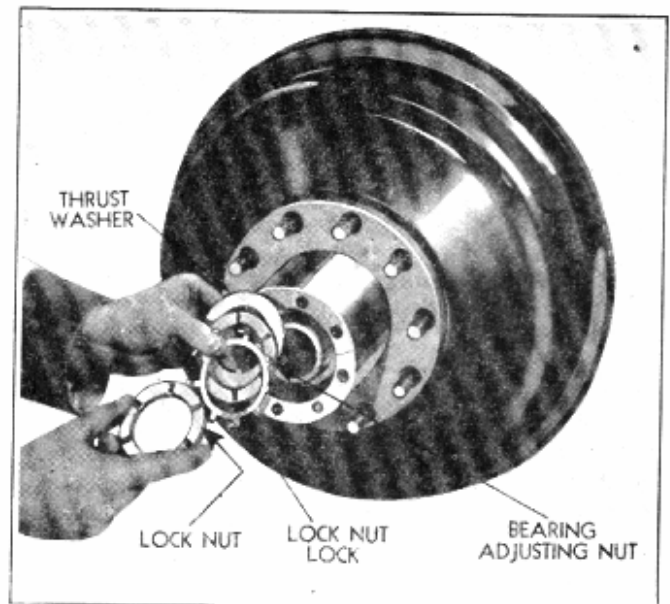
Installing Thrust Washer, Adjusting Nut, Lock Nut and Lock Nut Lock
